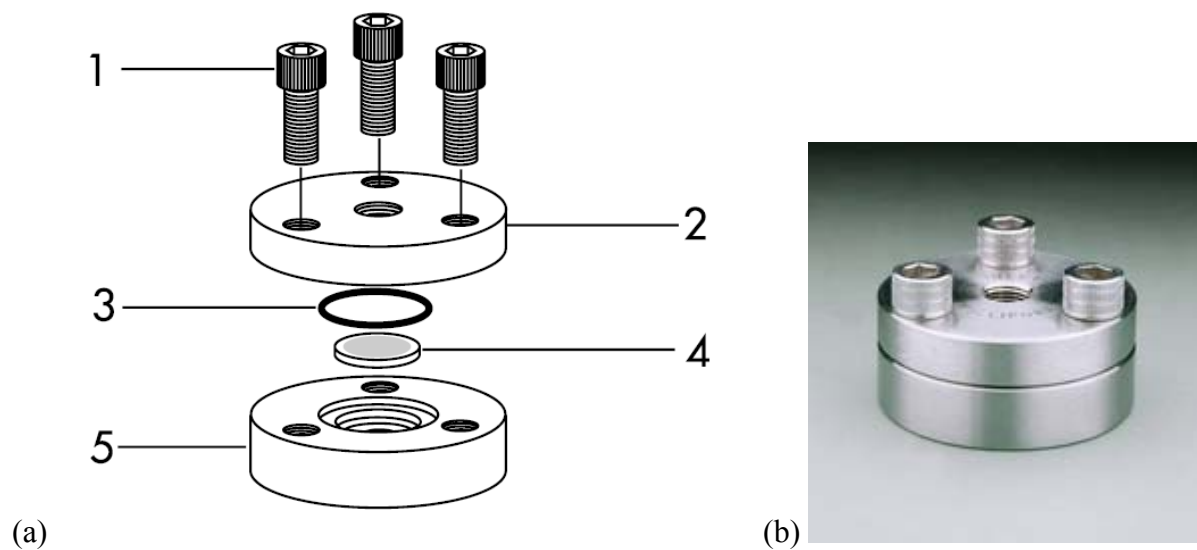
(a) Membrane holder blowup (1) Hex-cap screw (2) Inlet plate (3) O-ring (4) Filter screen (5) Outlet plate (b) Assembled membrane holder [53]
